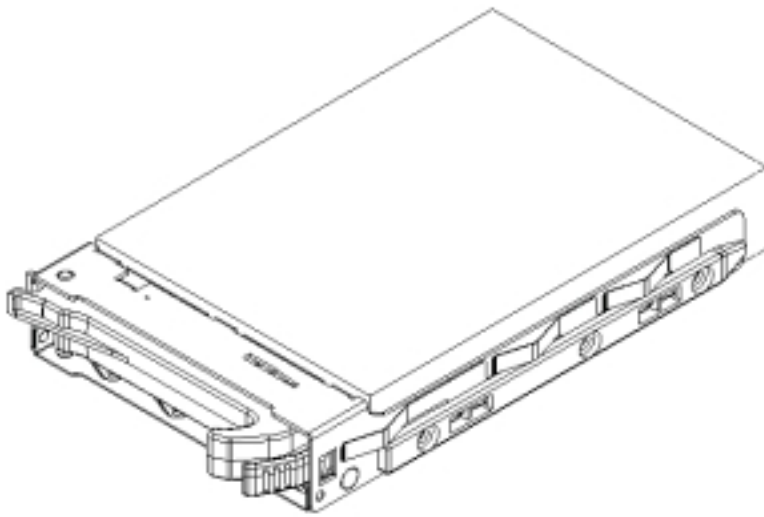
Hot-swap Drive Carrier with Drive Installed
